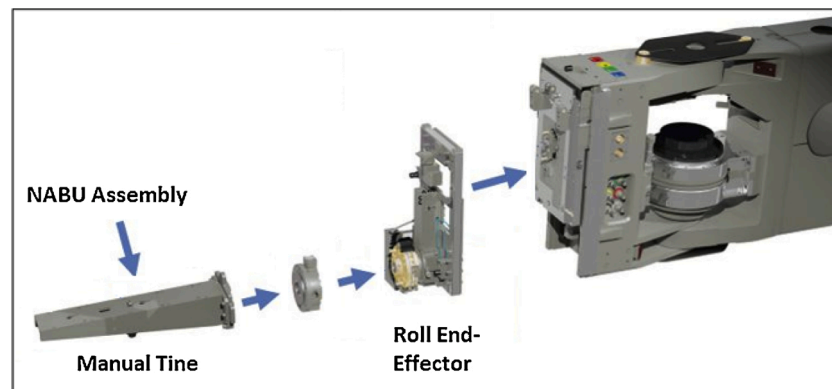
Roll End-Effector and tine assembly. This replaces the Task Module shown on the end of the Boom in Fig. 1.
